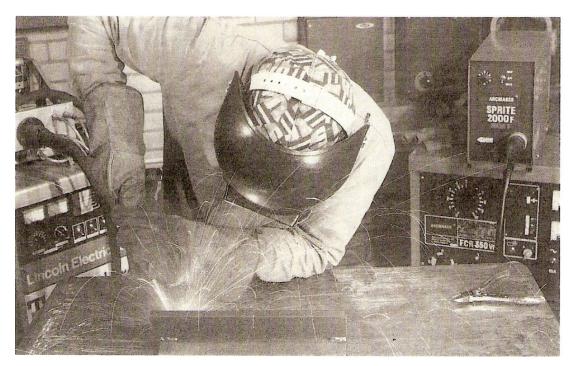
MAGS Welding a T-Fillet Test Piece
